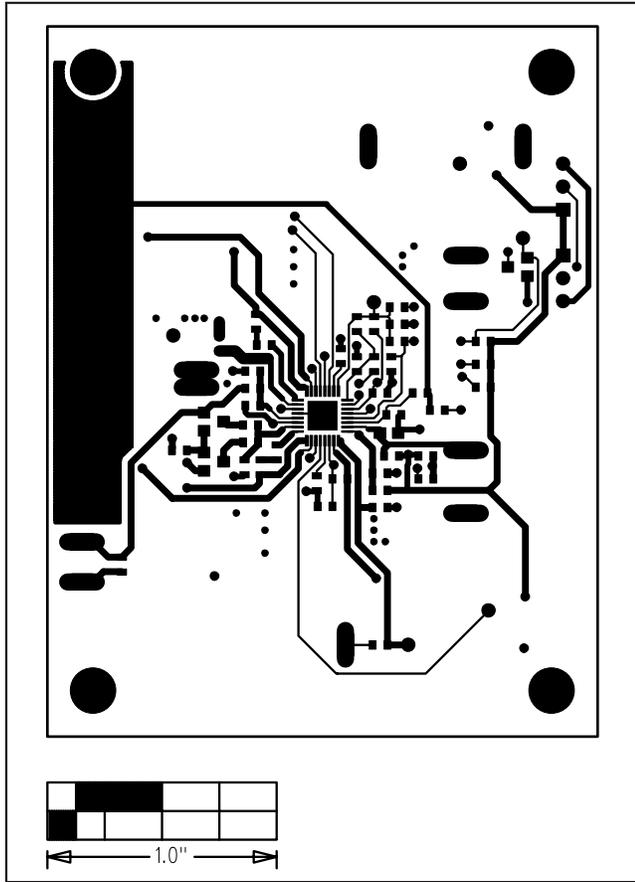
MAX17020 EV Kit PCB Layout—Solder Side
